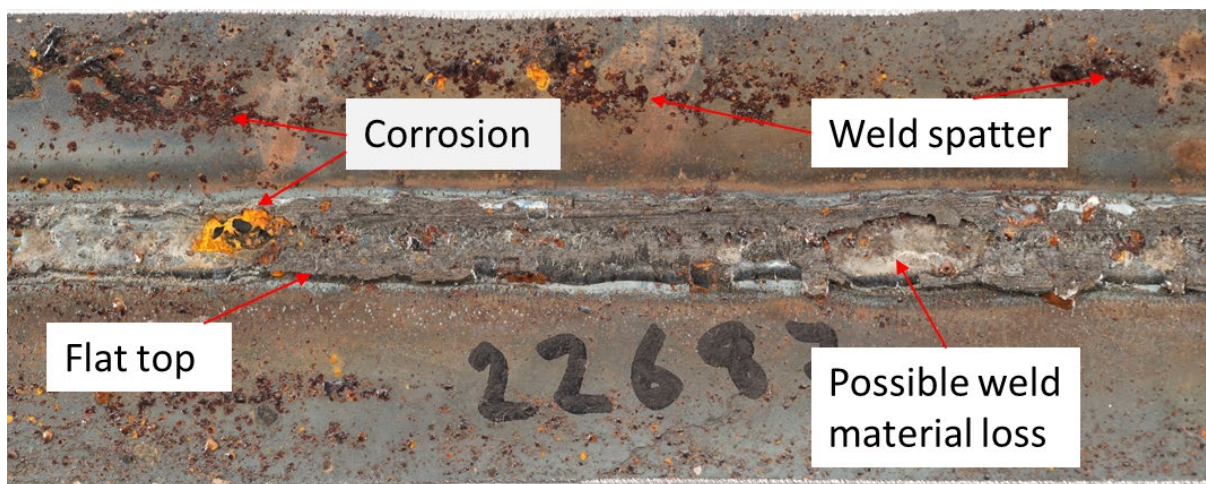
Photograph showing poor quality weld widespread corrosion and multiple weld defects
